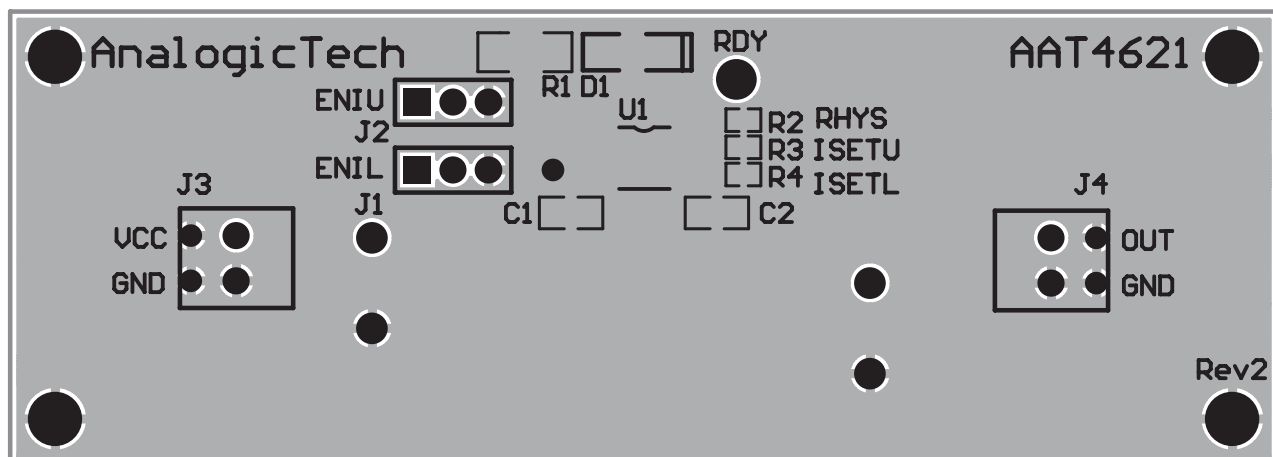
AAT4621 TSOPJW-12 Evaluation Board PCB Bottom Side.
